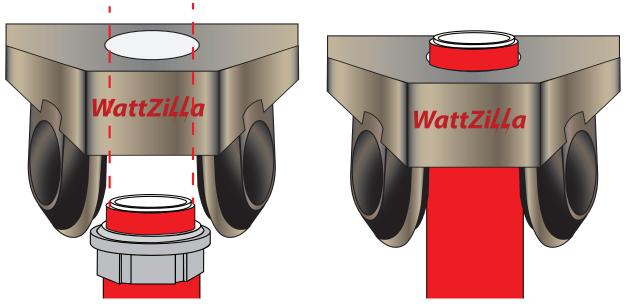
Attaching the DUO Cable Management Assembly Onto the Pole
